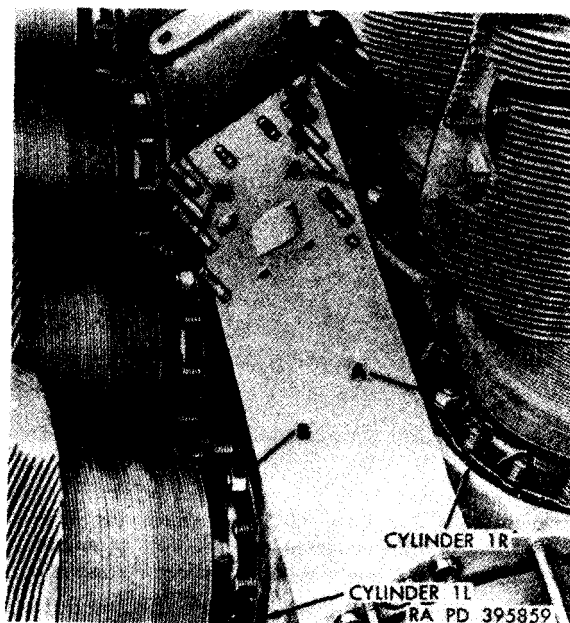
Removing or installing lower cylinder deflector straps and deflectors-right side.
